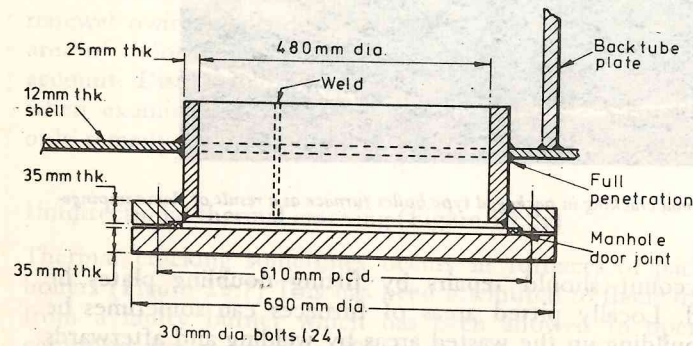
Repair to wasted packaged boiler shell where internal access is limited
